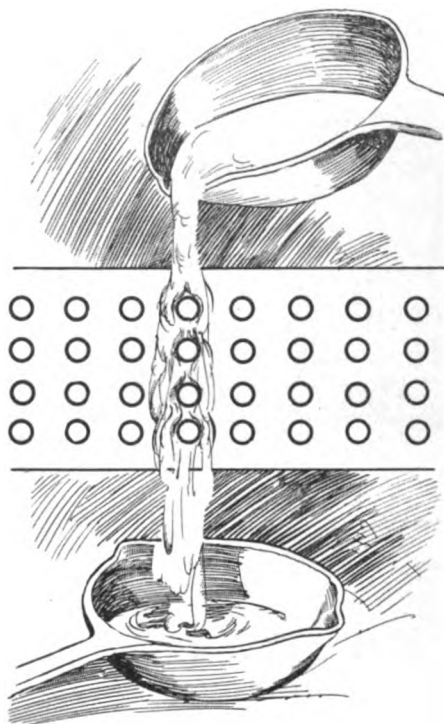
Illustrating how solder is poured over the leaky radiator tubes
